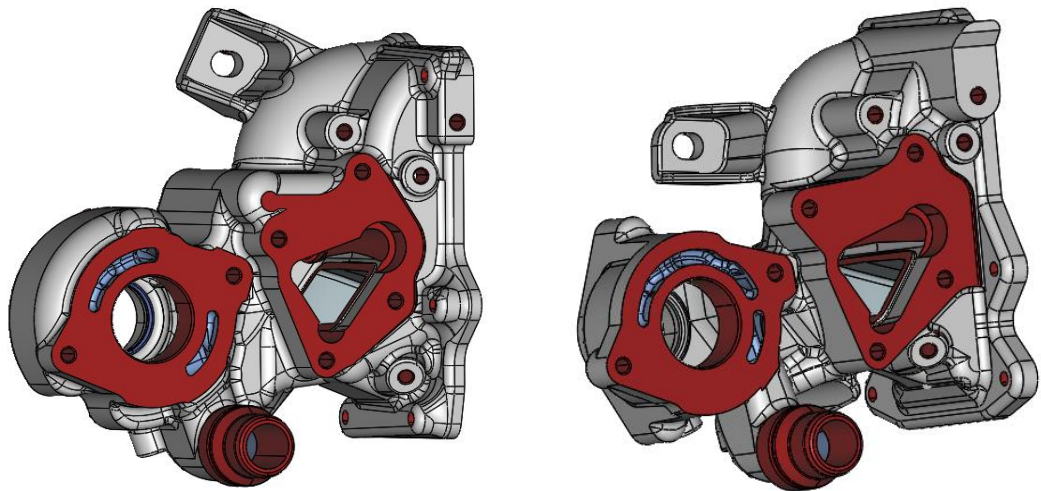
Changes in the Inlet Casting (Outside View)
